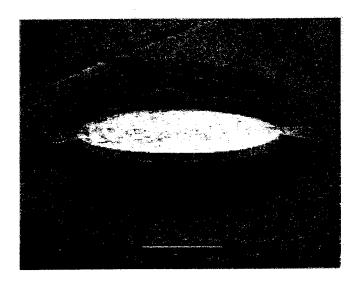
Microfloat valve showing warpage due to volumetric expansion caused by microprojection welding.
